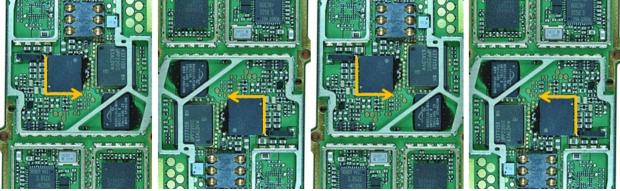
"L-Pass" Dispensing on Mobile PCB
